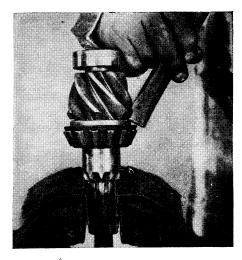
Drive off pinion bearing cage by tapping between teeth of pinion alternately on opposite sides of inner race
